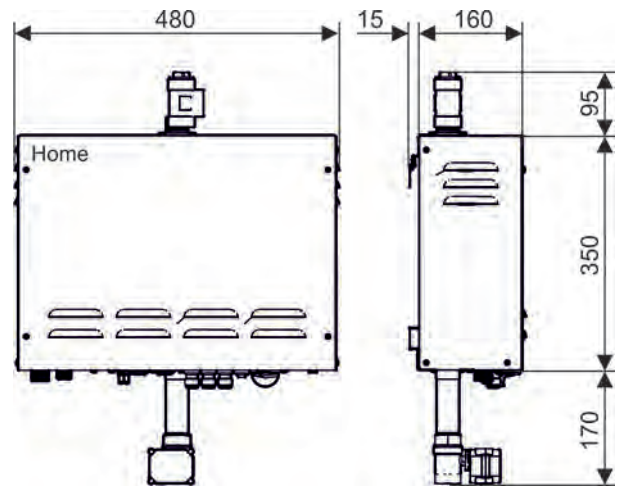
Tylö Home type Steam Generator, dimensions in millimetres
